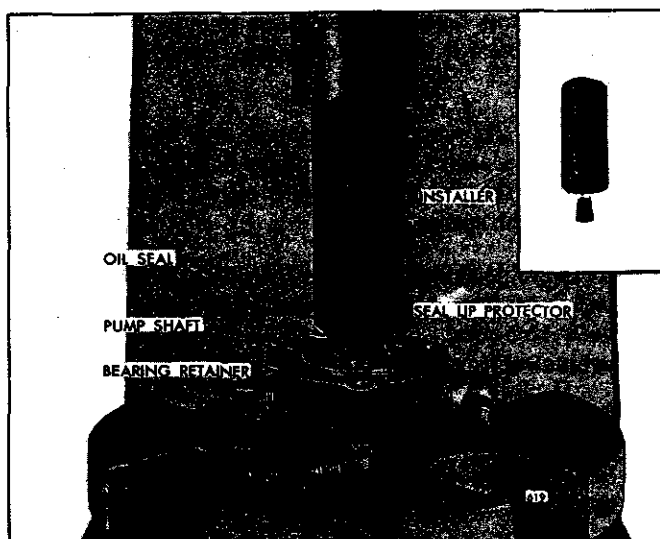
Installing Pump Shaft Oil Seal in Bearing Retainer
